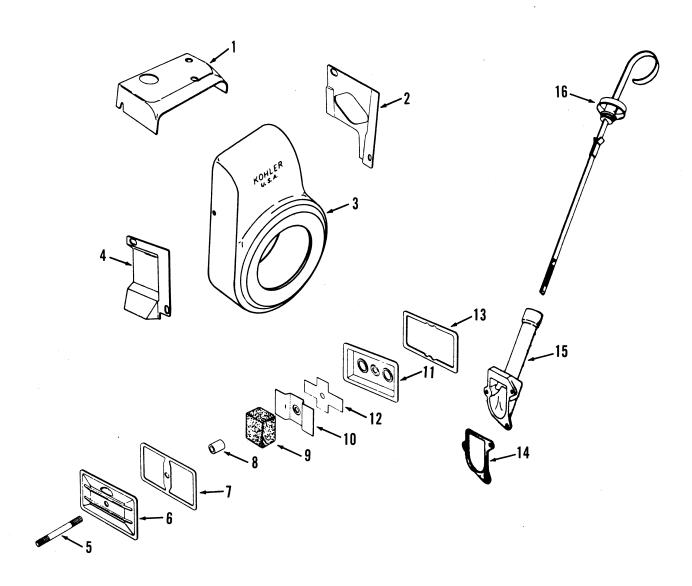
HOUSING, PCV AND OIL FILL GROUP
